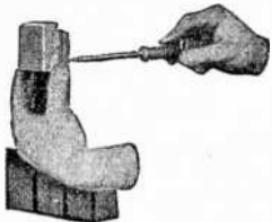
,132.—*How to assemble an air circuit breaker 3.* Method of attaching stationary carbon burning tip to bracket.
